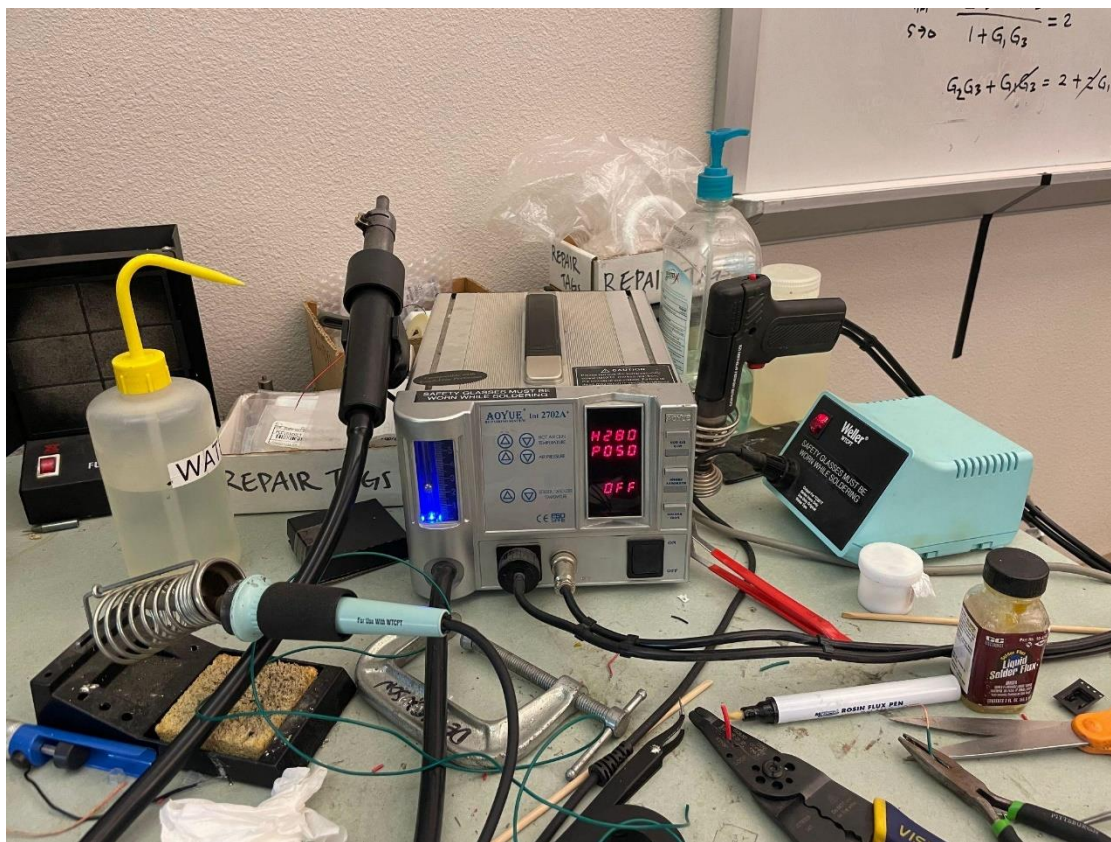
Soldering Station with Heat Gun and Soldering Iron
